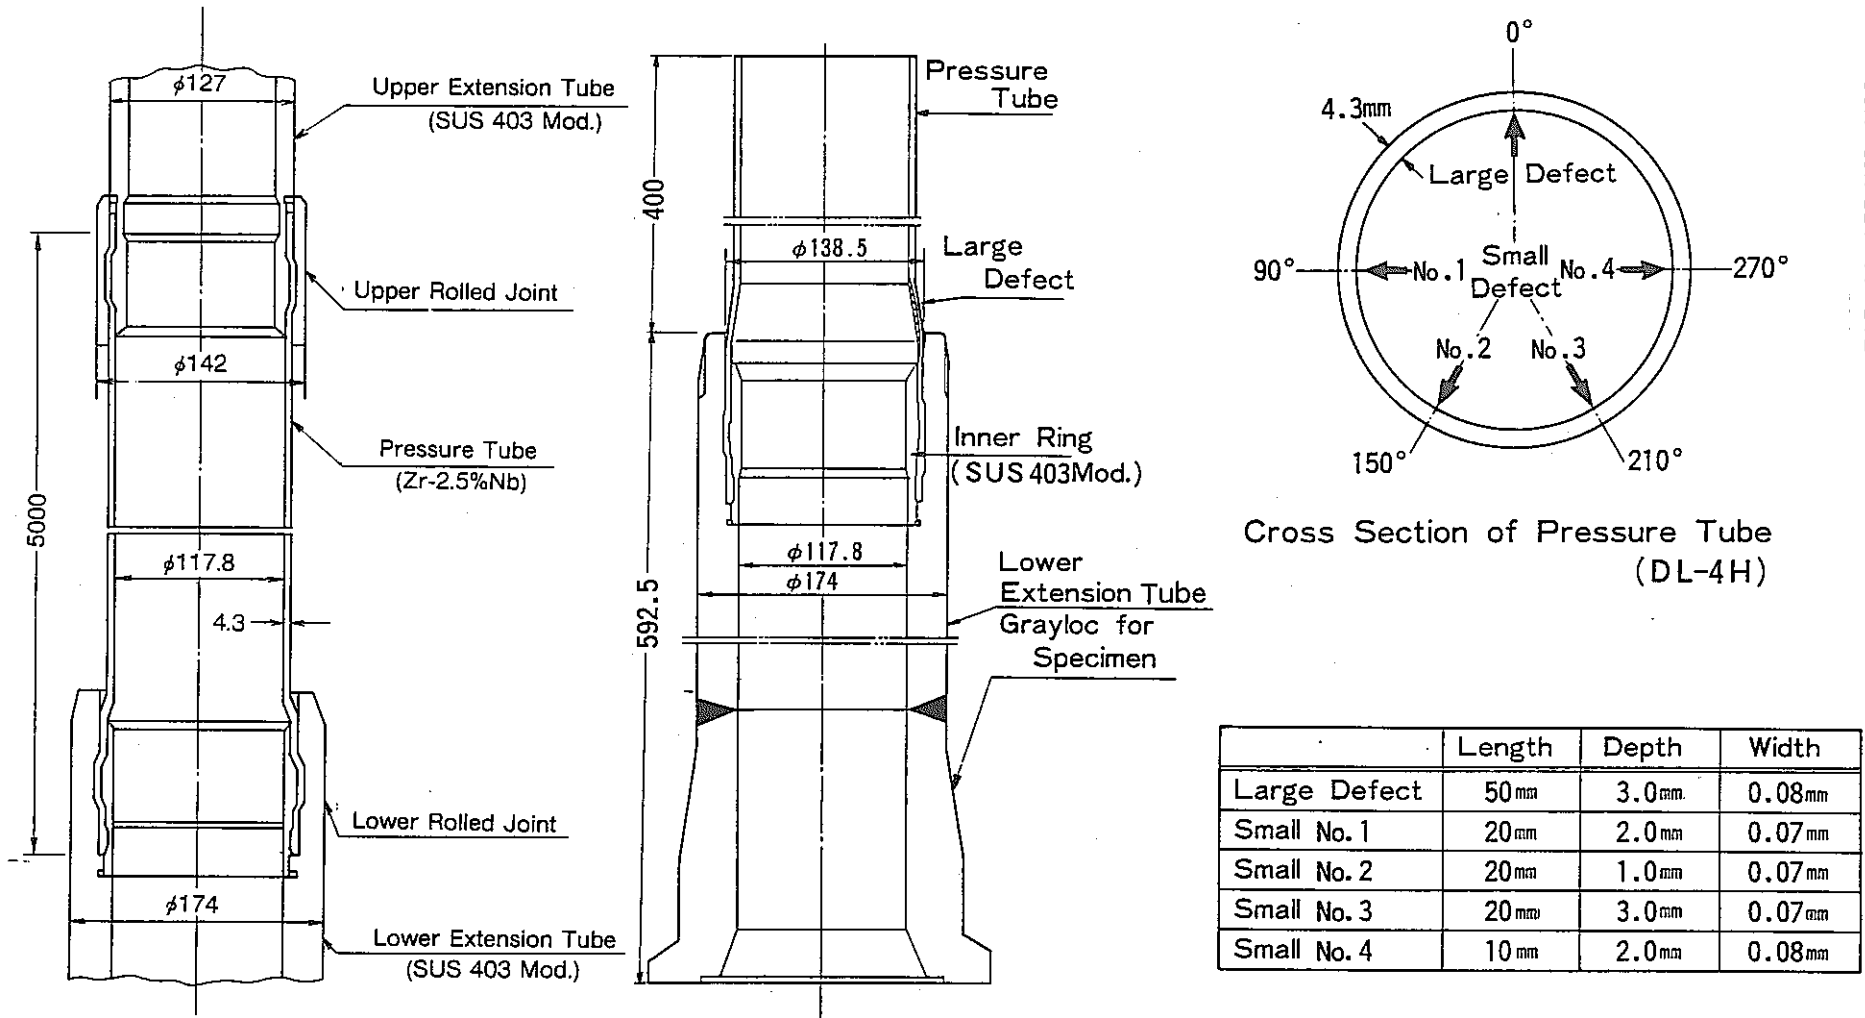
Pressure tube assembly with rolled joint portions and lower rolled joint specimen with sharp defects
